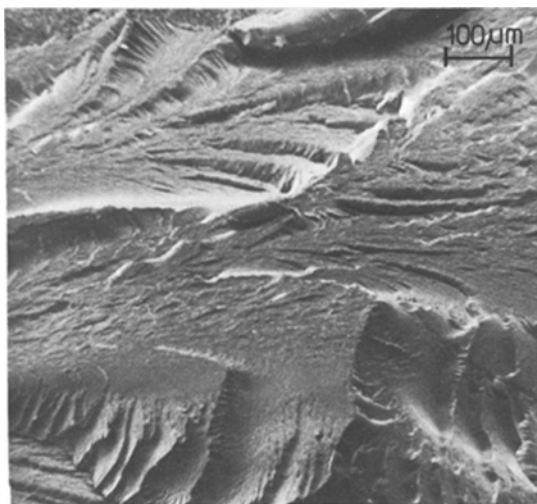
Fracture surface typical of a “fast” unstable fracture showing a rough, stepped topography.
